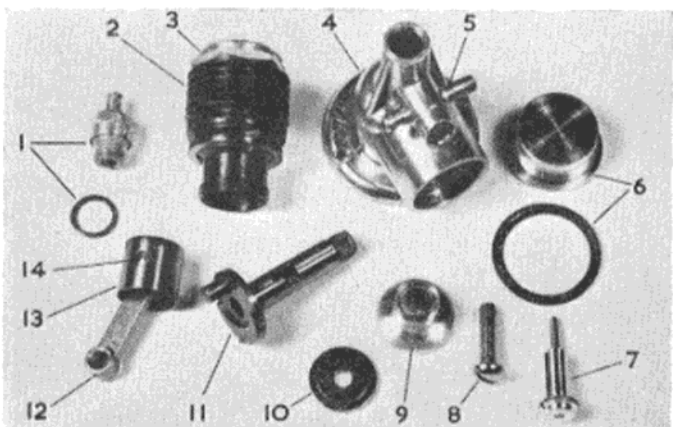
The parts of a typical small glowplug engine. 1—glowplug and washer, 2—cylinder, 3—cylinder-head, 4—crankcase, 5—carburettor spraybar, 6—crankcase backplate and gasket, 7—needle-valve, 8—propeller screw, 9—prop drive hub, 10—prop washer, 11—crankshaft, 12—connecting-rod, 13—piston, 14—gudgeon-pin.
